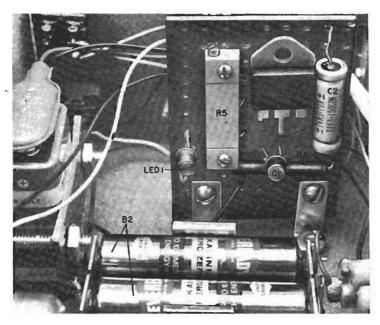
Current modulator is built on perf board. LED must align with lens and adjustment R5 must be available after mounting board.
